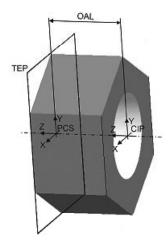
Thread-cutting die, hexagonal shape — Extruded non-cutting part
